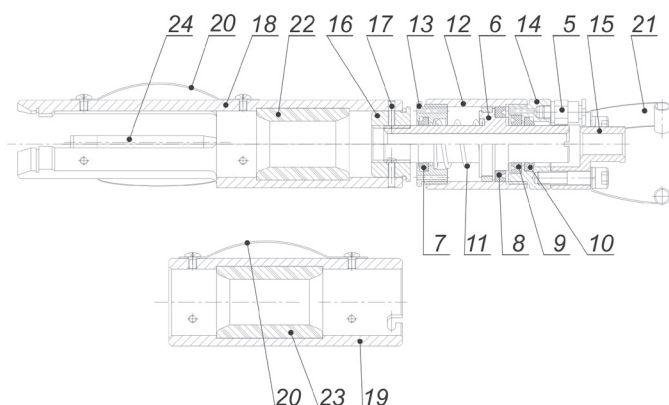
Scheme of the module for installation and dismantling the pressure transducer: 5 – pneumatic quick coupler, 6 – piston rod, 7-10 – sealants, 11 – spring, 12 – cylinder, 13-14 – cylinder covers, 15 – element of the flexible clutch, 16 – bayonet coupling, 17 – locking screws, 18 – dismantling gripper, 19 – installation gripper, 20-21 – flat springs, 22-23 – compliant faucet, 24 – inspection micro-camera
